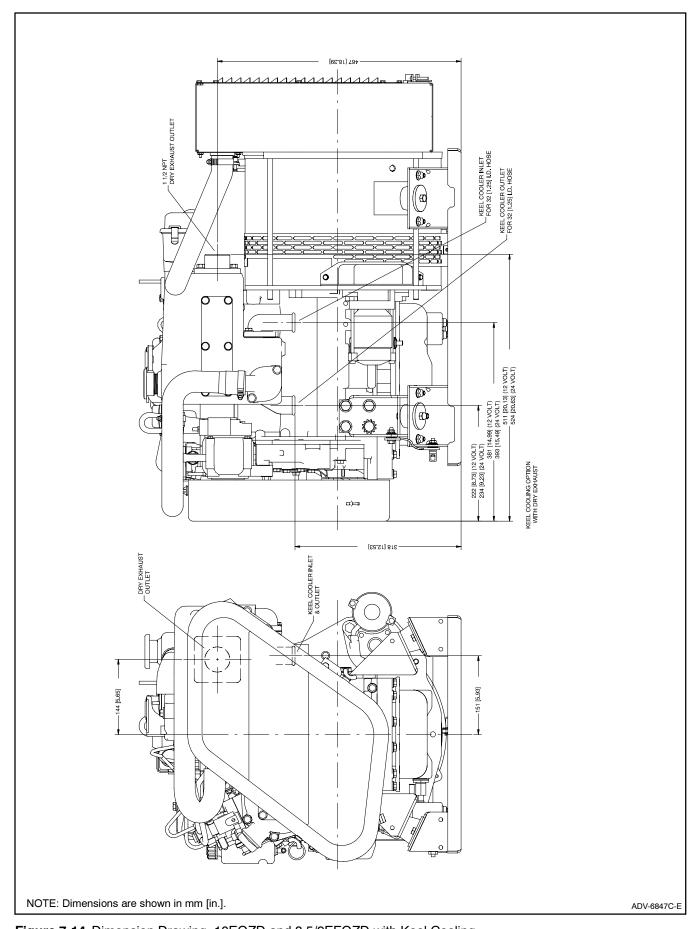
Dimension Drawing, 10EOZD and 8.5/9EFOZD with Keel Cooling
